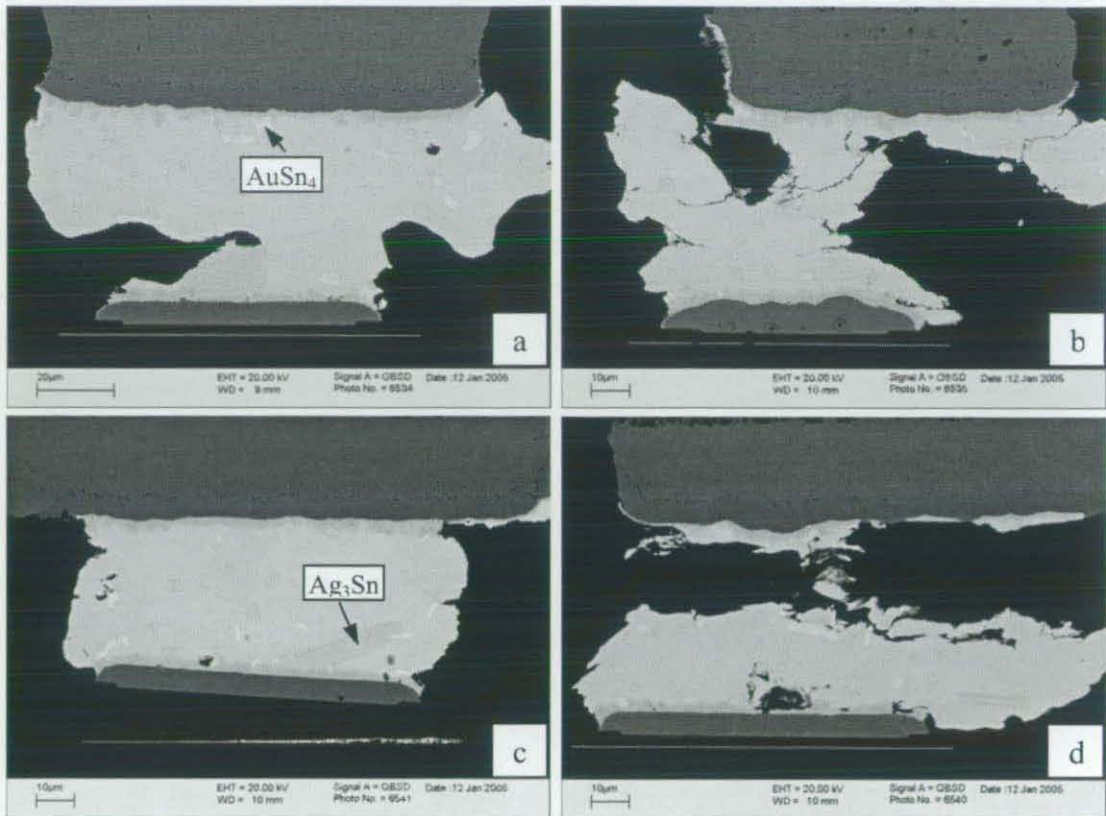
Irregular solder joint shapes after reflow soldering when pads with solder mask were used, a) b) narrow neck, c) UBM lift and d) solder disconnection.
